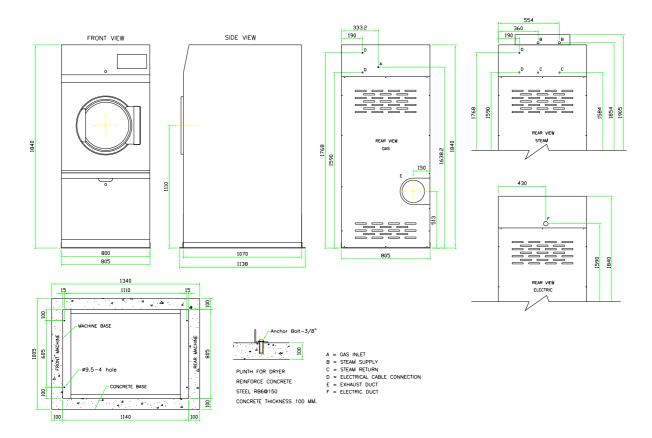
Dryer Model DE30 lb. Technical Dimension
